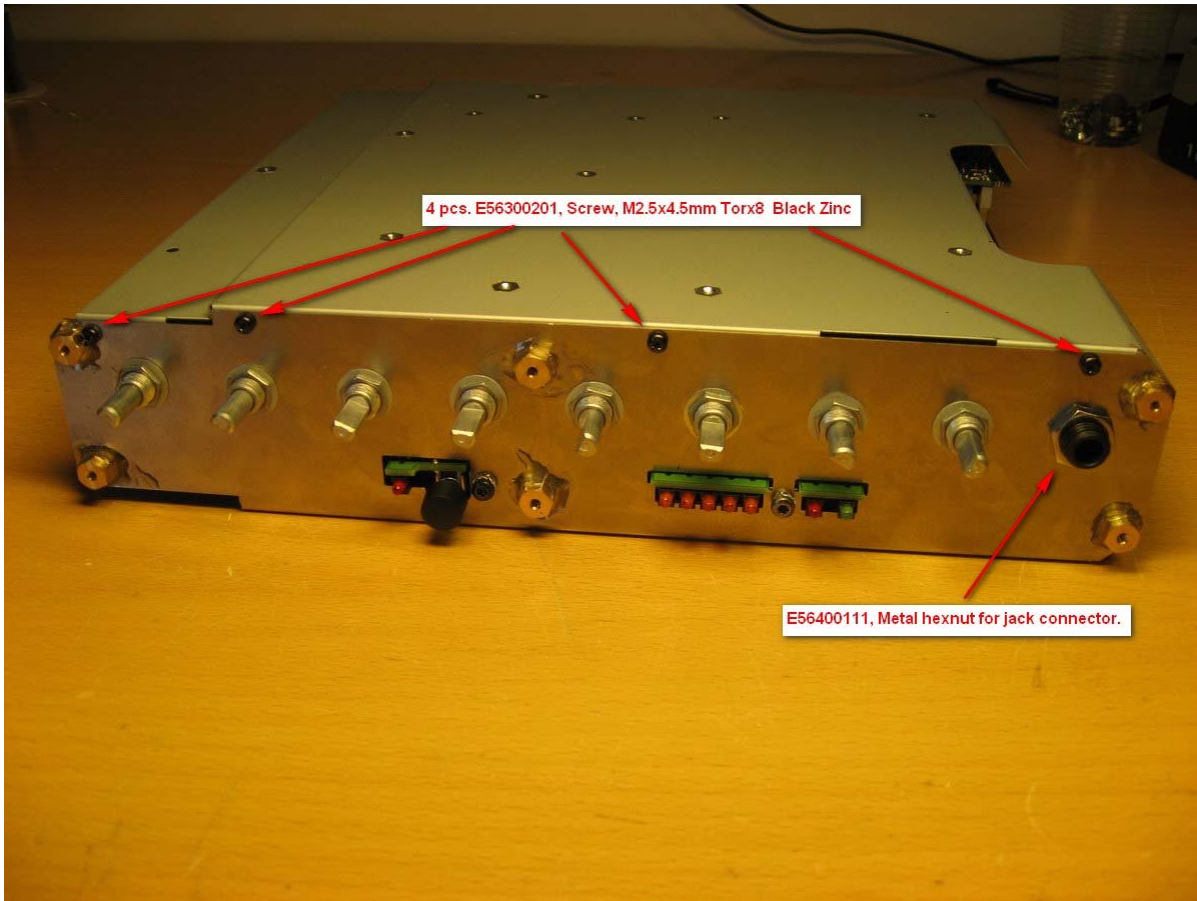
Mount “front assembly” to “main board assembly” using four screws and one hexnut at the front side of the product as shown in the picture.
